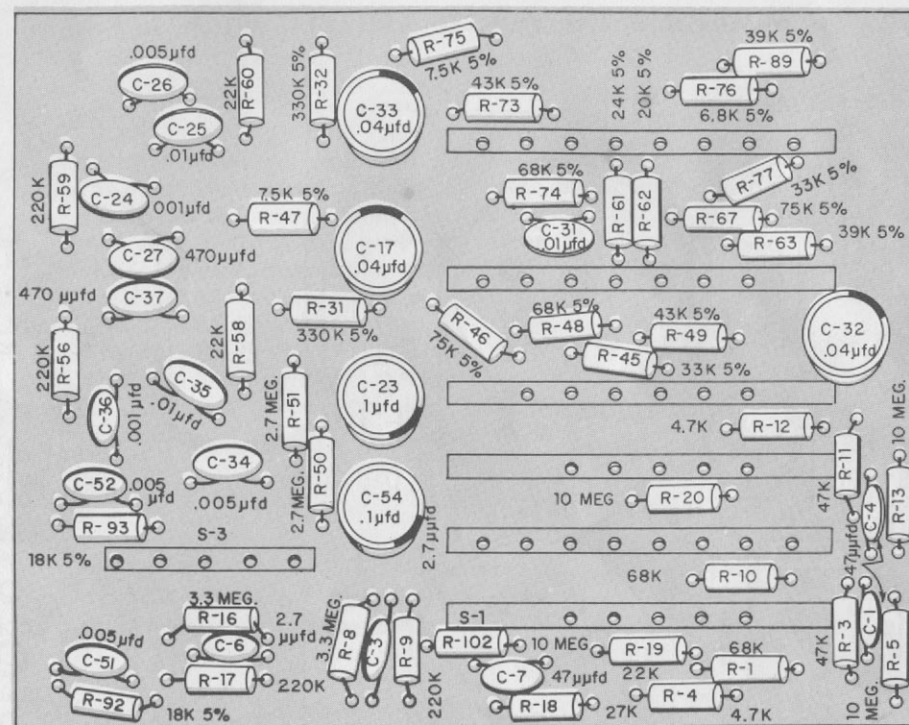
PARTS MOUNTING ON SMALL PRINTED CIRCUIT BOARD
